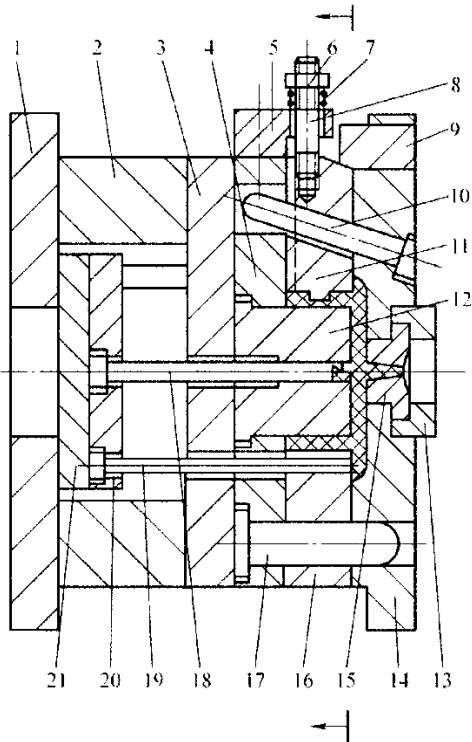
Injection mold with slider angle pin for side core-pulling
